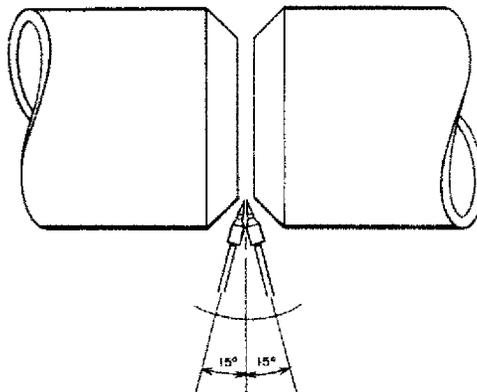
Electrode oscillating procedure for welding the root bead with a GTAW torch.
